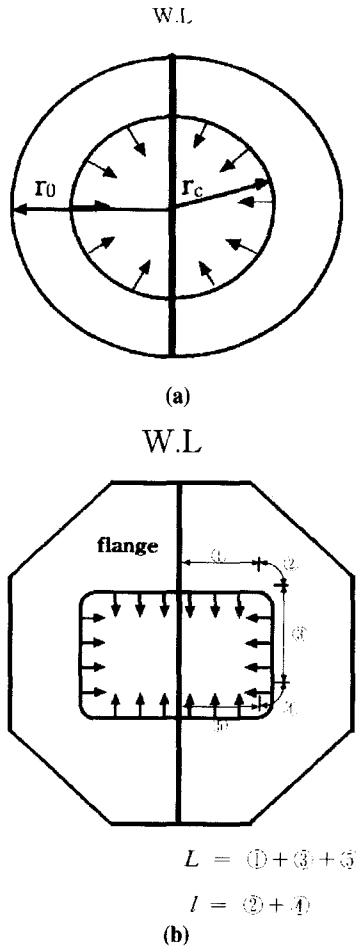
Schematic view of drawing force acting at the punch rim with a different BHF in (a) cylindrical cup drawing (b) rectangular cup drawing
